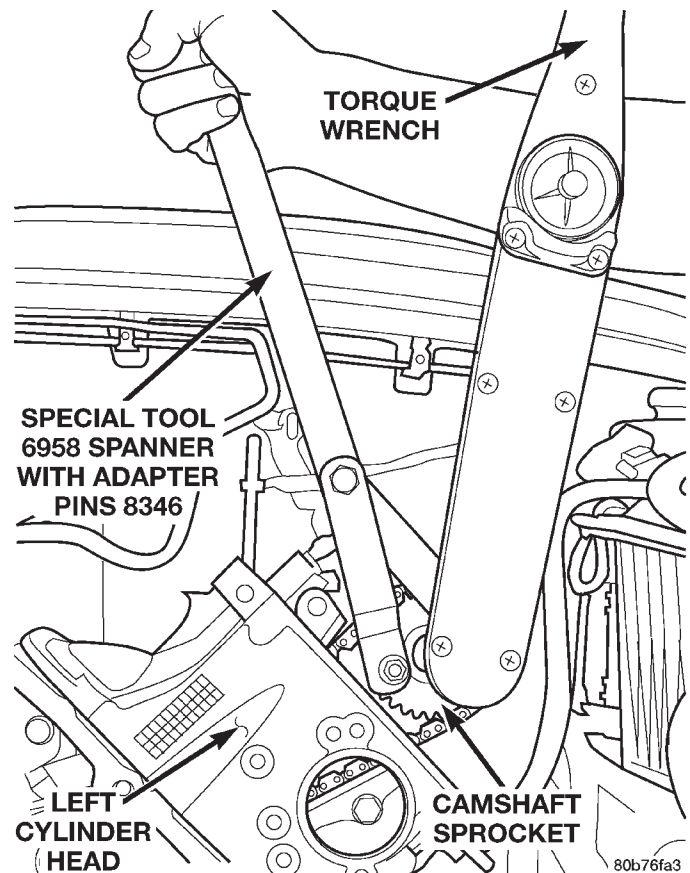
Tightening Left Side Camshaft Sprocket Bolt
